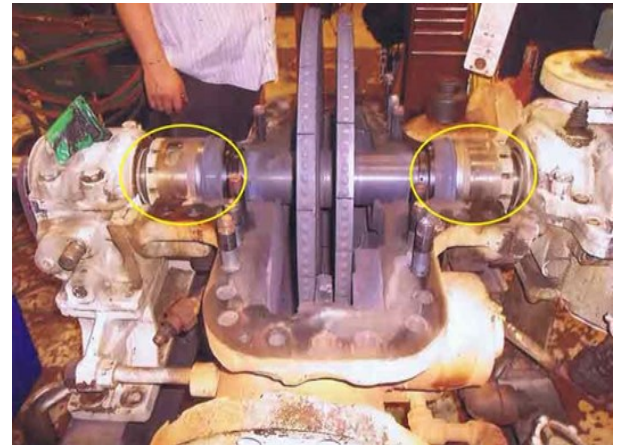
Mechanical seal to be replaced with Brush seal (Inpro/Seal).
